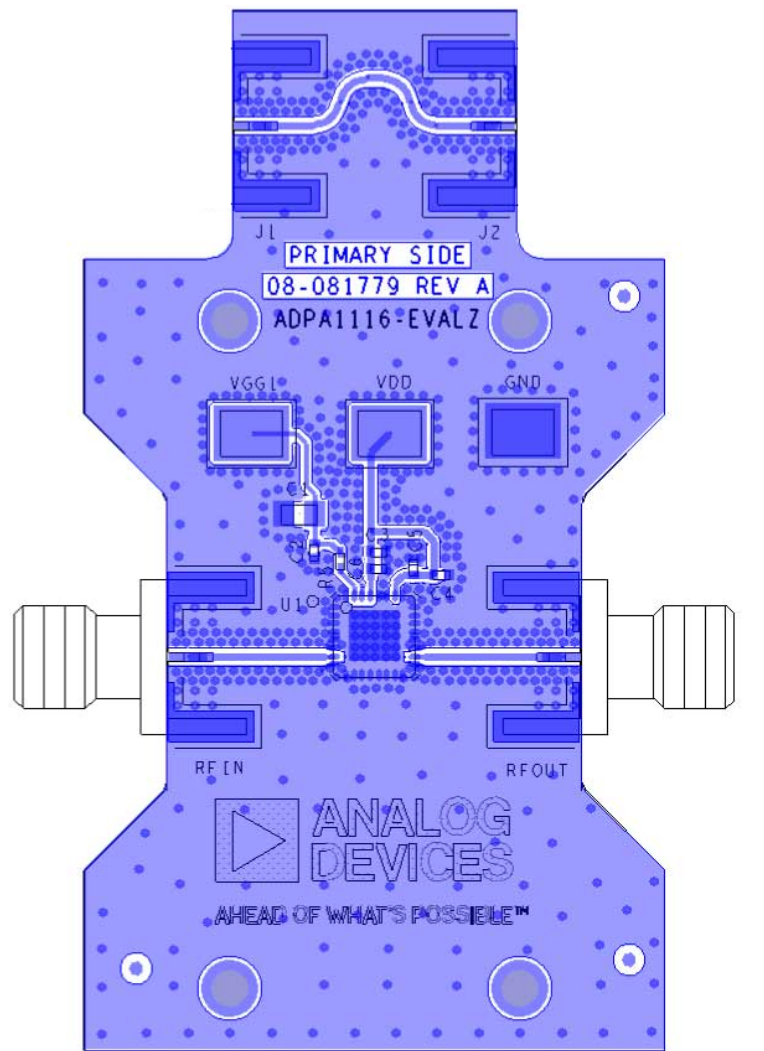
ADPA1116-EVALZ Assembly Drawing (Note That J1 and J2 Are Not Installed)
